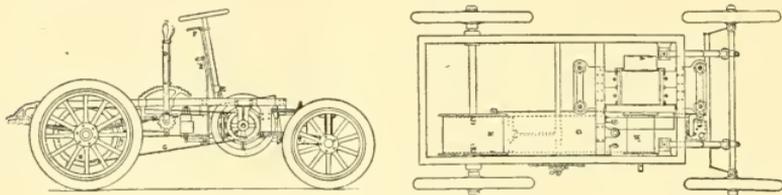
ELEVATION AND PLAN OF VALLÉE CAR.
